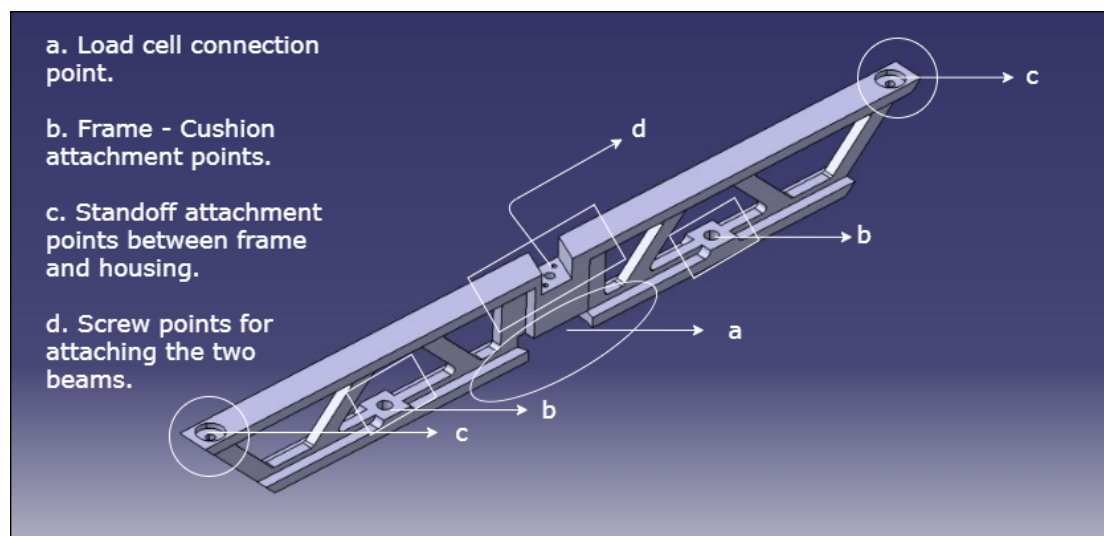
Beam A of the frame assembly highlighting the attachment features. In an assembled frame, in relation to this view, the cushion will be fixed on the bottom side and housing on the top.
